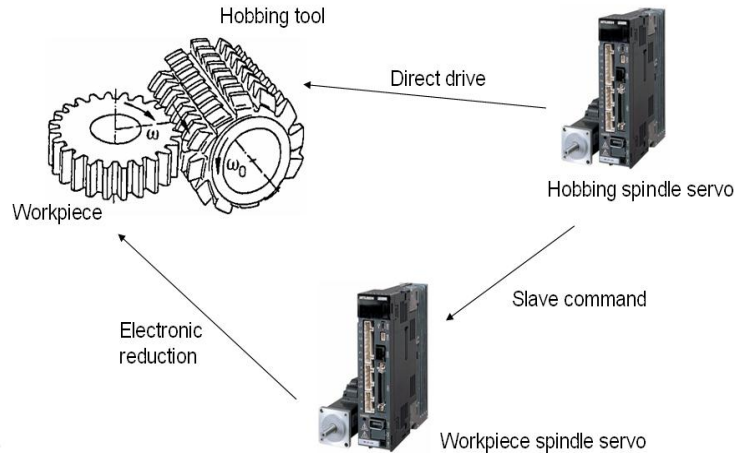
The working principle of mechanically decoupled gear hobbing [58]
